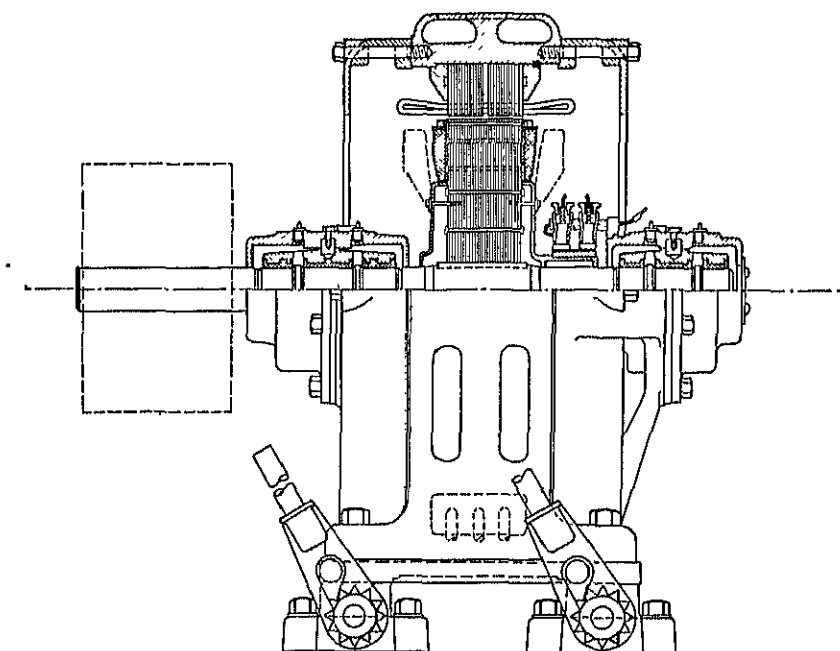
Assembly drawing of 115-hp., 1200-r.p.m., bracket-type synchronous motor.
